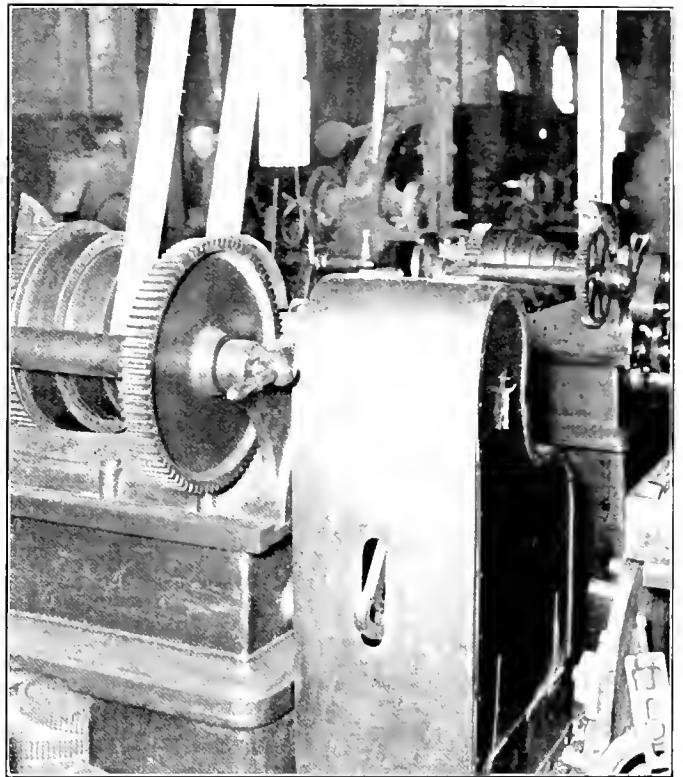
Lathe Feed Gears Enclosed Insuring Absolute Protection.
